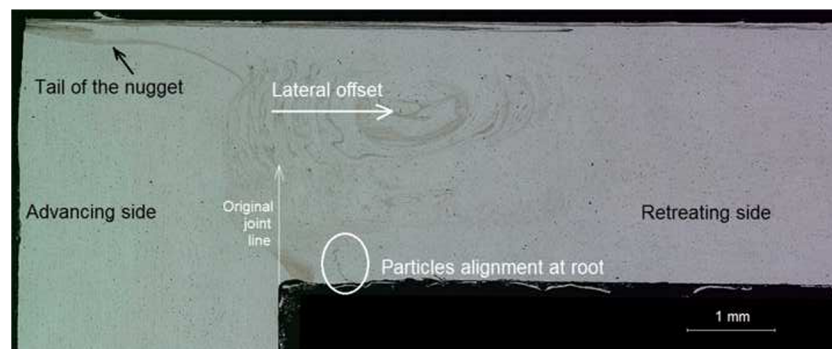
Optical macrograph of the cross section from the middle of the weld
